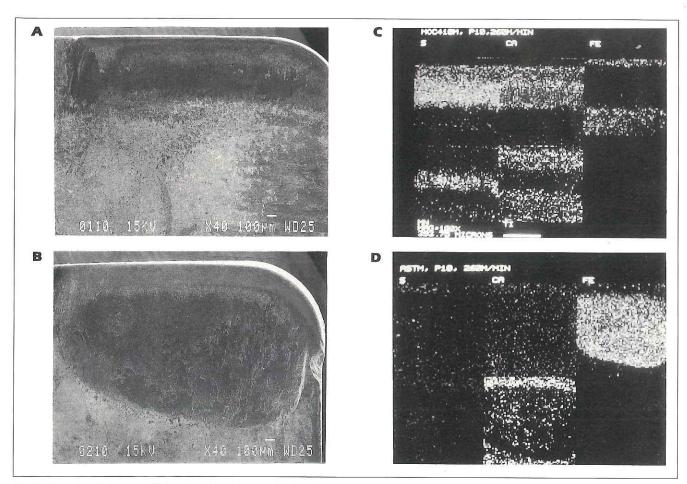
Wear of tool face type P10, when it has been used for machining of A) M-steel 42 CrMo 4 M 260 m/min, 5.0 min, or,
